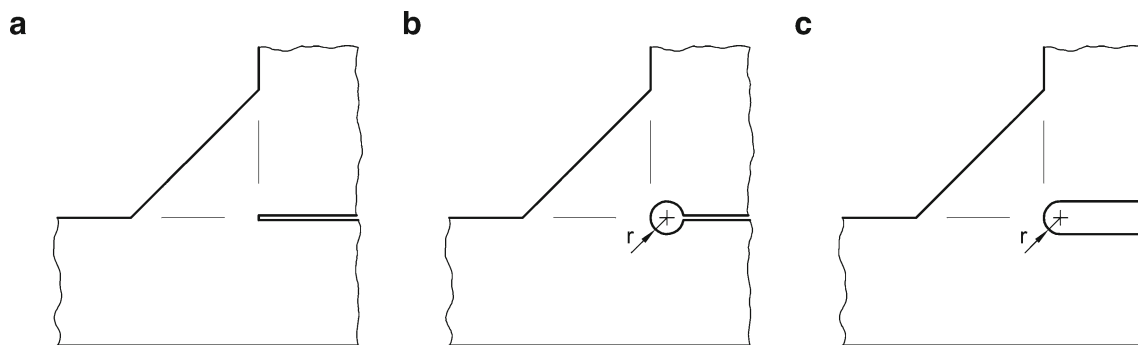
Rounding of the weld root of a non-penetrating fillet weld by a keyhole and a U-shaped notch
